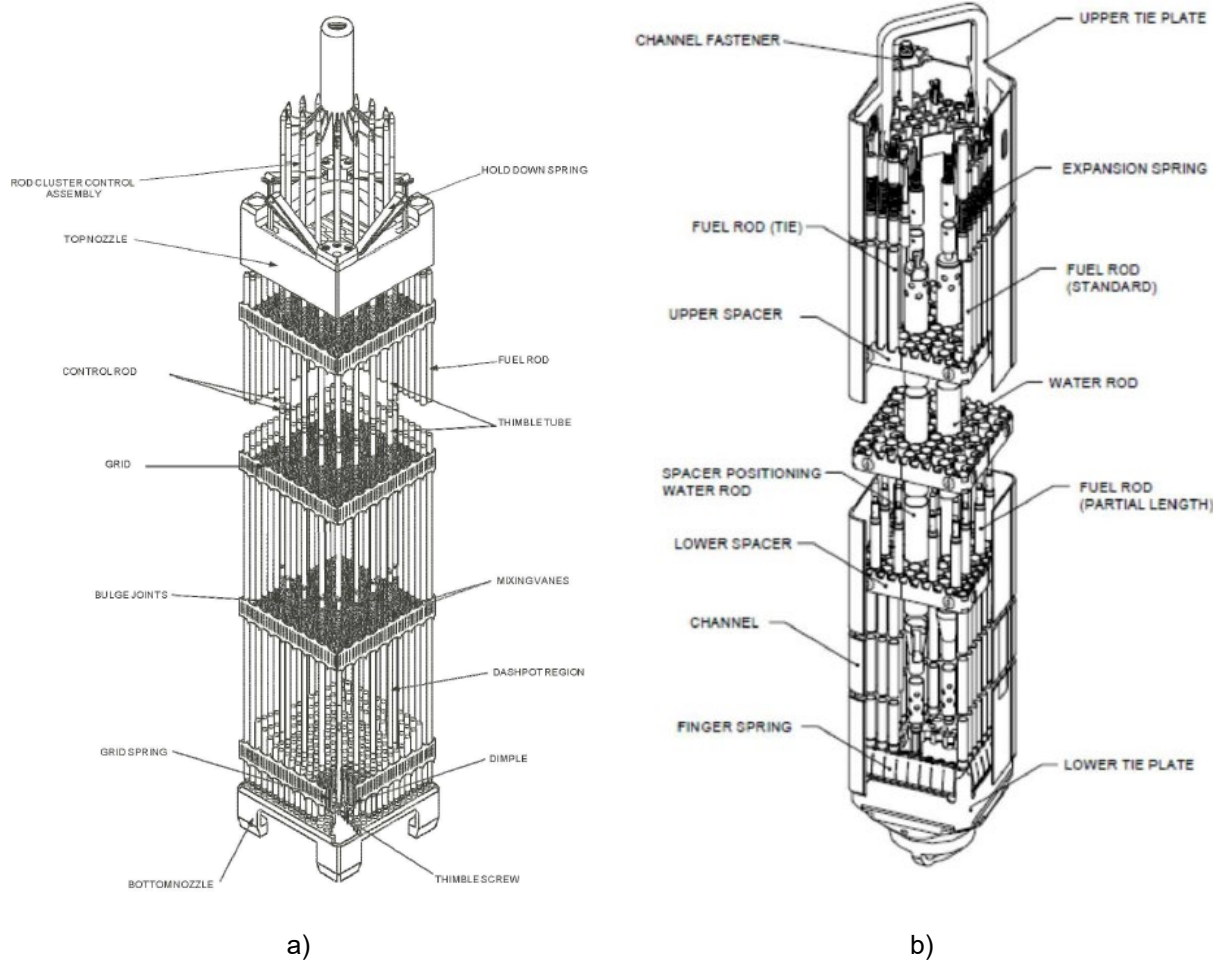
Example Fuel Assemblies a) PWR, b) BWR (from NUREG-2214)
